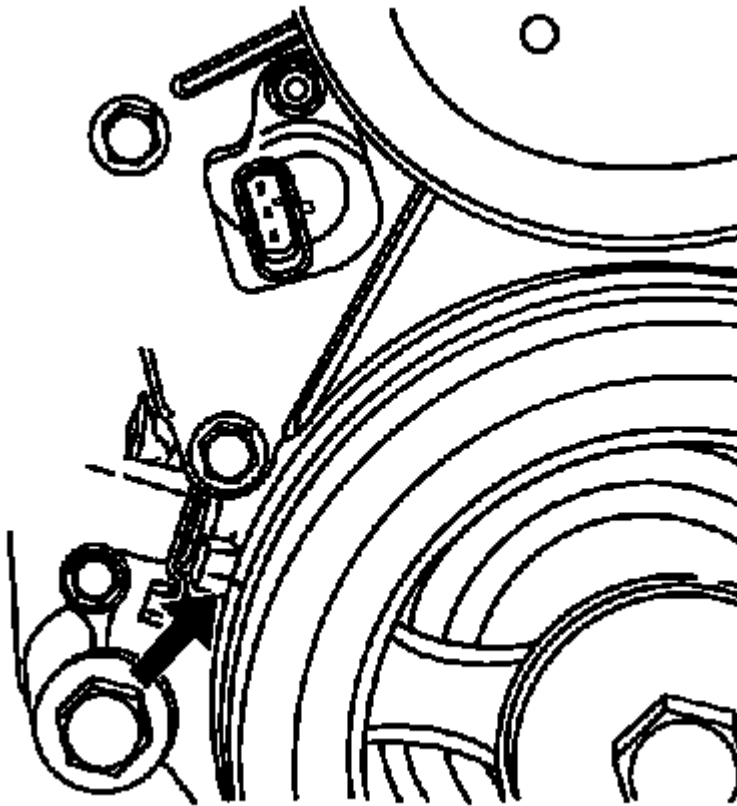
View Of Crankshaft Balancer Mark Aligned With Engine Mark
